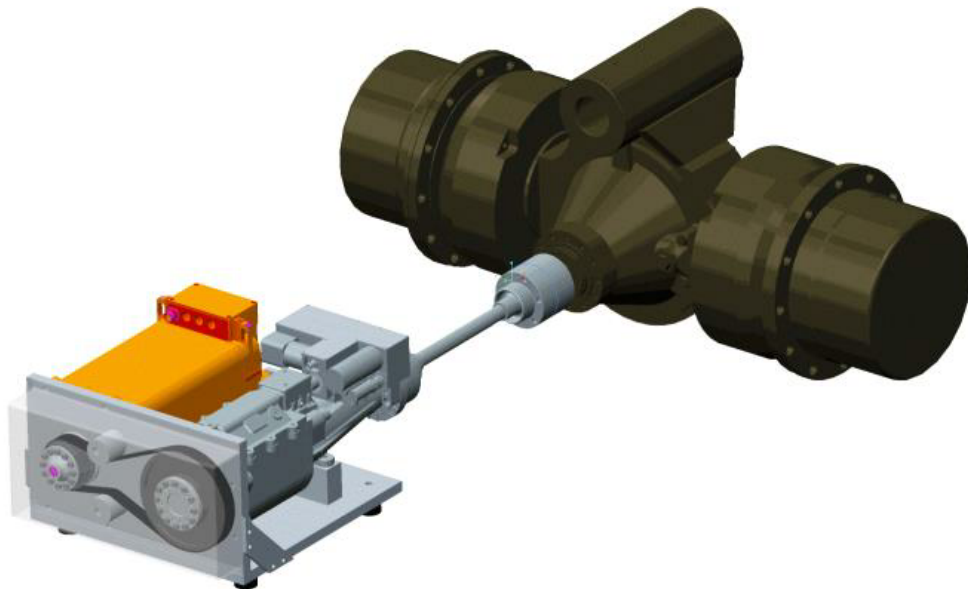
CAD model of rear axle drivetrain, electric motor to wheel hubs (Liljestrom, 2014)
